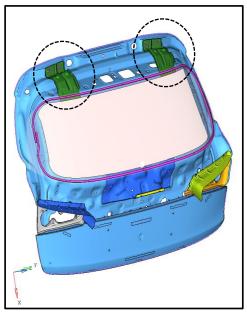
Bridge type hinge bracket which is assembled with screw to outer sheet metal
